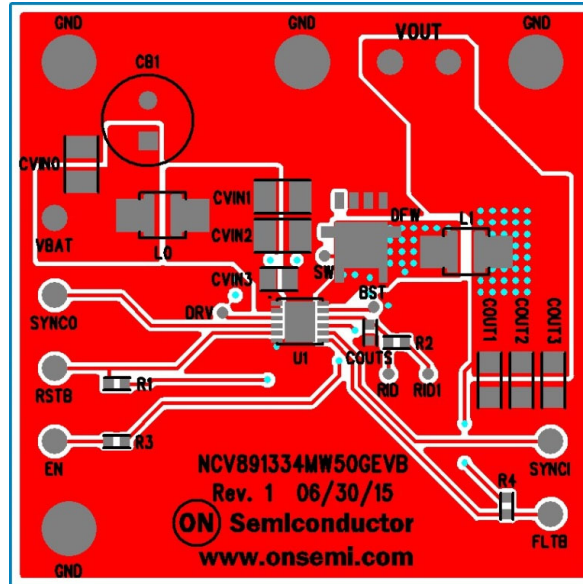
NCV891334MW50GEVB PCB Layout – Top
